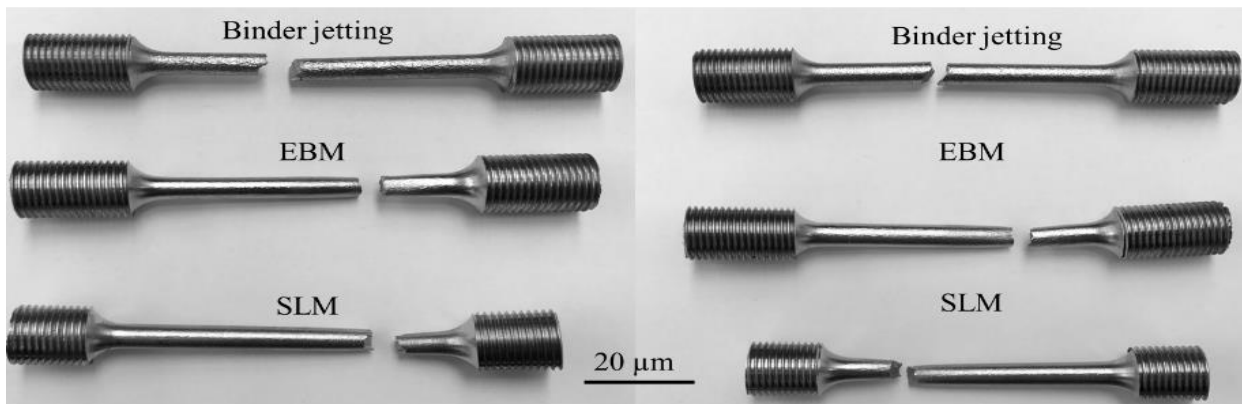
Macro-scale inspection of the three powder bed-based AM technologies fracture where double cup fractures are visible; (left) as-fabricated and (right) HIPed.
